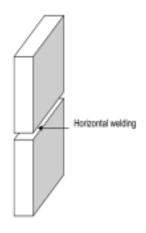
Scheme of placement of components to be welded for horizontal welding
